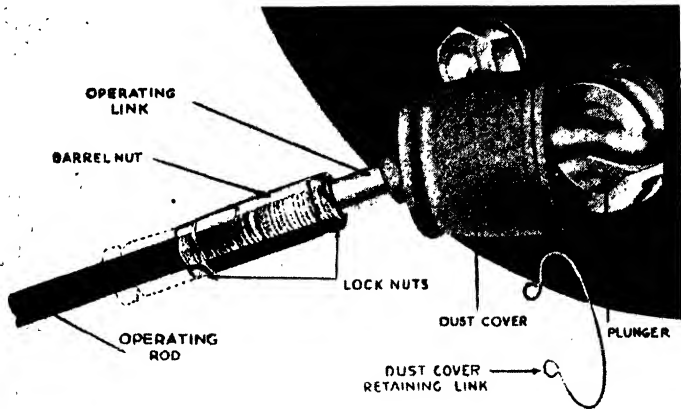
WHEN A COMPLETE OVERHAUL IS NEEDED THE BENDIX-COWDREY OPERATING RODS, ONE OF WHICH IS SHOWN HERE, MUST BE DISCONNECTED BEHIND THE BACK PLATES
